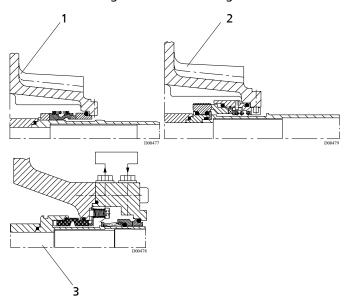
Mechanical seals in conical seal chamber (A-type)
